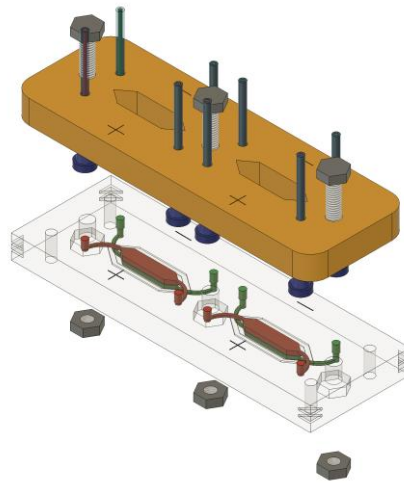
Exploded CAD view of the Liver-on-Chip (LoC) assembly. The design integrates alignment holes, screw holes, and inlet/outlet identifiers (“+” and “-”) to facilitate accurate assembly and fluidic connection. The device is secured using screws, nuts, and ferrules, ensuring robust sealing and stable integration of tubing connectors for perfusion experiments.
